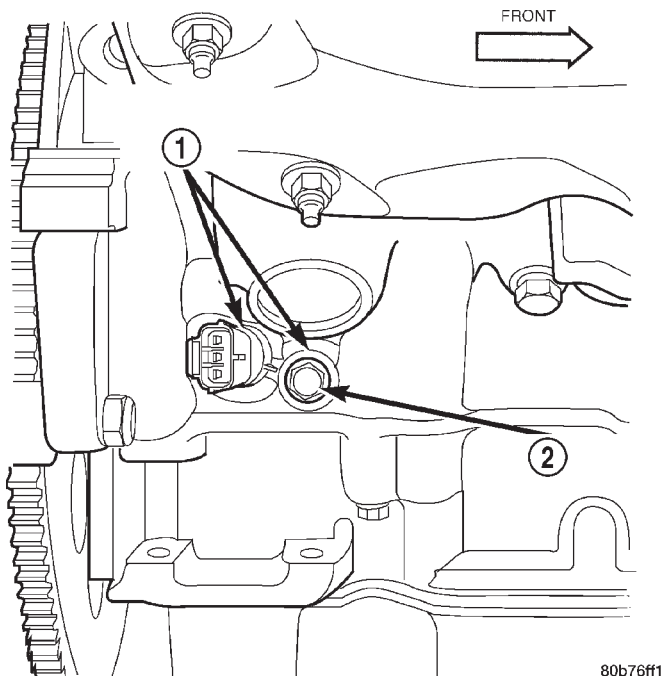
CKP Sensor Location/Removal/Installation—4.7L V-8 Engine
